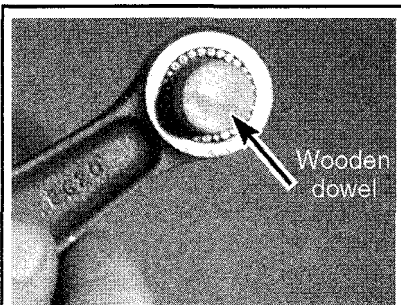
then hold them in position using a small dowel or wrist pin installation tool
